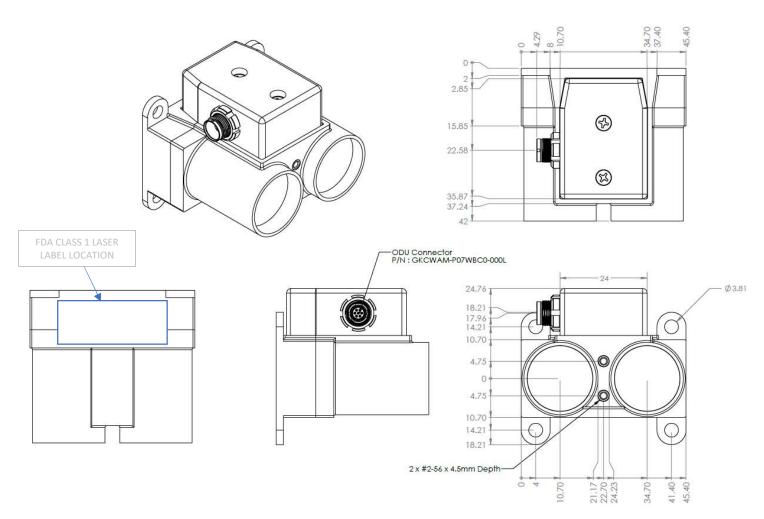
Exterior and mounting dimensions of the Ruggedized WASP-200 LRF (MU1 and MC1)
